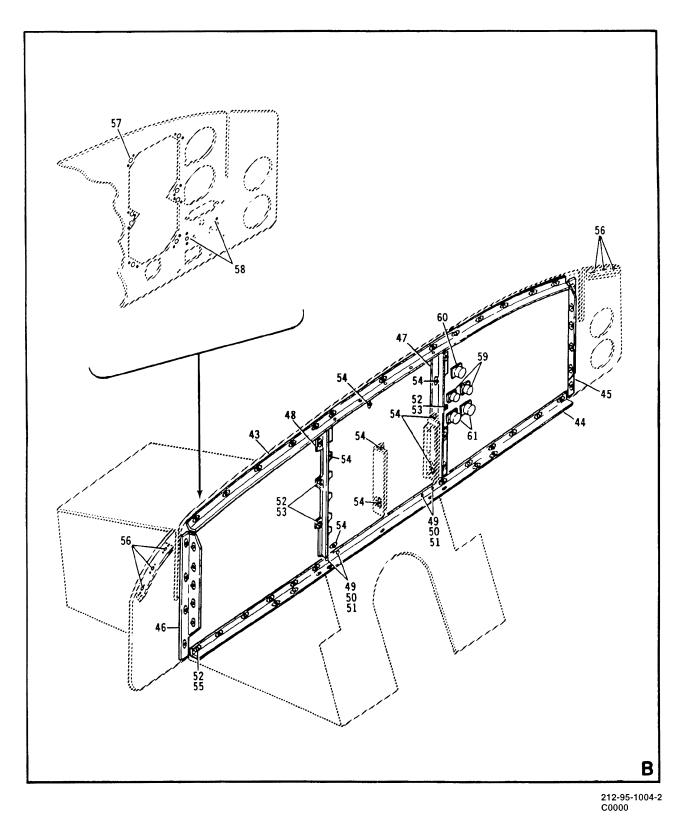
Panel assembly, instrument (30597 thru 30603, 30611 thru 31311, 35001 thru sub) (Sheet 2)
